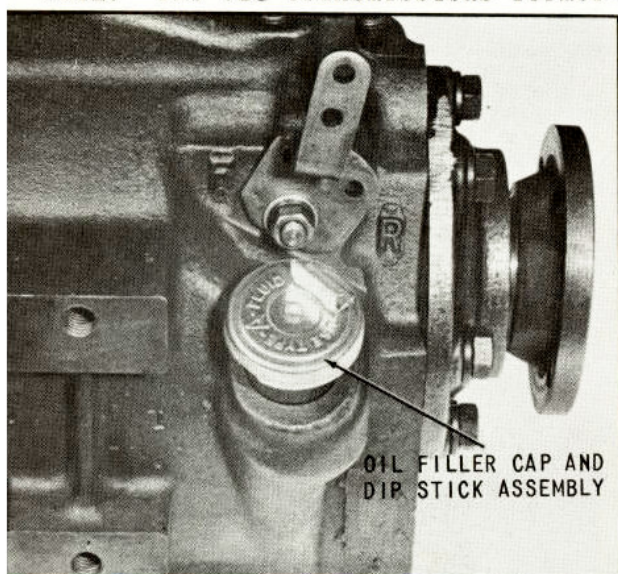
Installation of Oil Filler Cap and Dipstick Assembly
